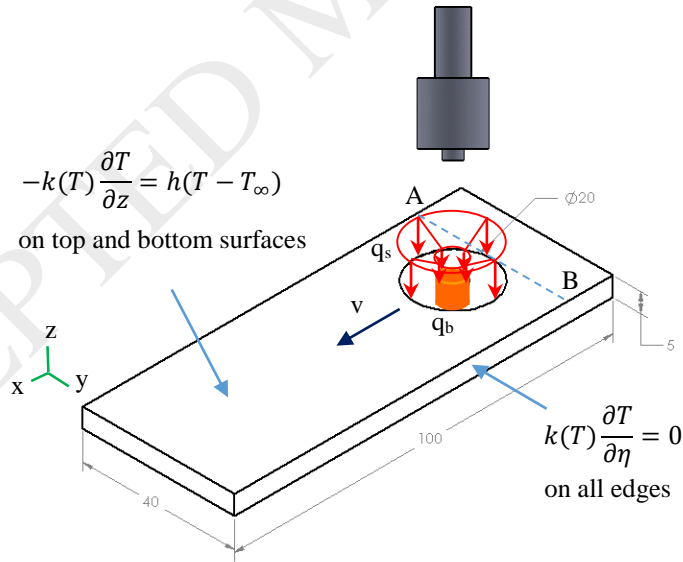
Numerical of workpiece with body and surface moving heat sources.
